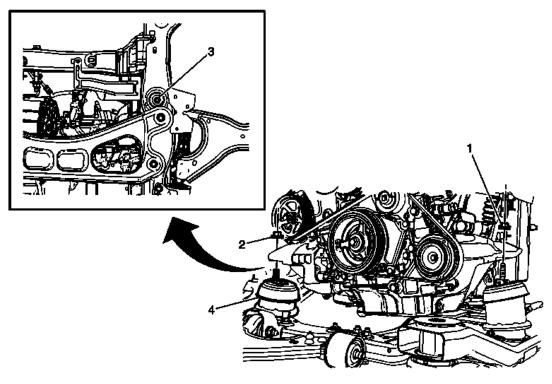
Identifying Engine Rear Mount Assembly Components Courtesy of GENERAL MOTORS COMPANY
